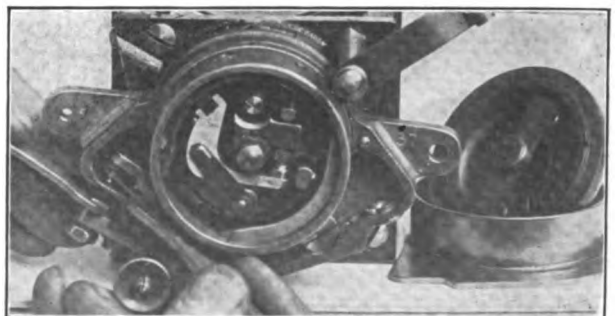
Adjusting Contact Screw and Using Gauge on Bosch Z R 4 Magneto, Providing Dual Ignition.
